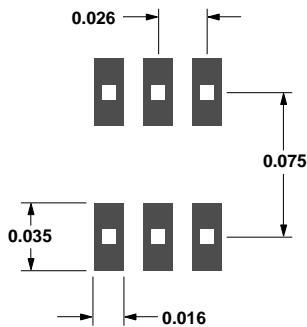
PCB Pad Layout, SOT-363 (dimensions in inches).
